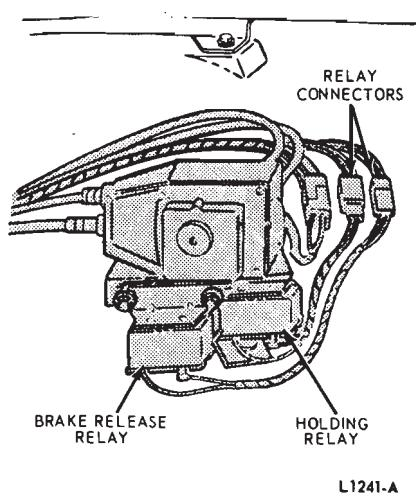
Brake Release and Holding Relays, Installation—Lincoln Continental
